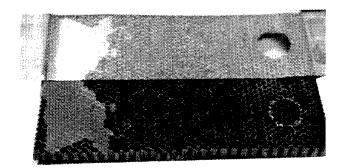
Failure surfaces resulting from peel testing of the Untreated honeycomb and AF131-2 adhesive conditioned 30 days at 70°C/100% R.H., indicating fillet bond pull-out, cohesion failure and skin adhesive disbond.
